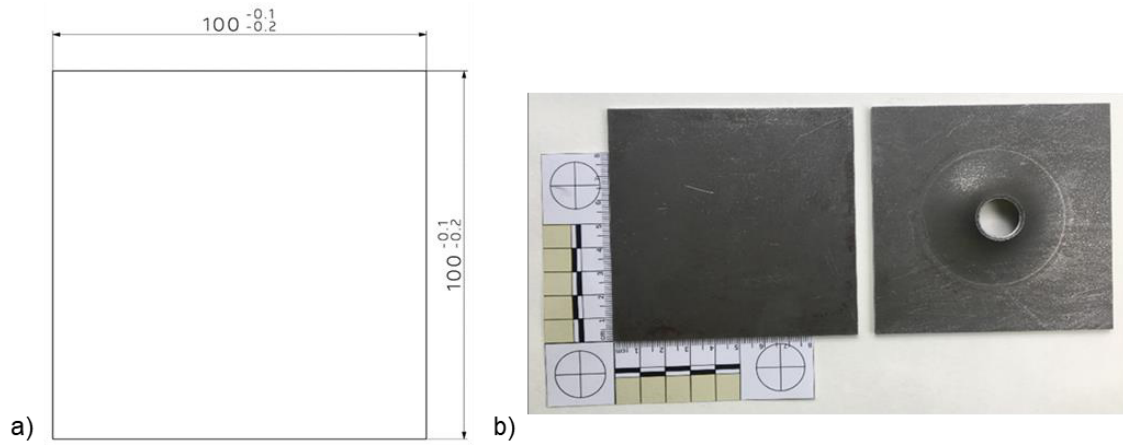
a) Specimen geometry used for hole expansion tests. b) HER specimen before (left) and after (right) the test.
